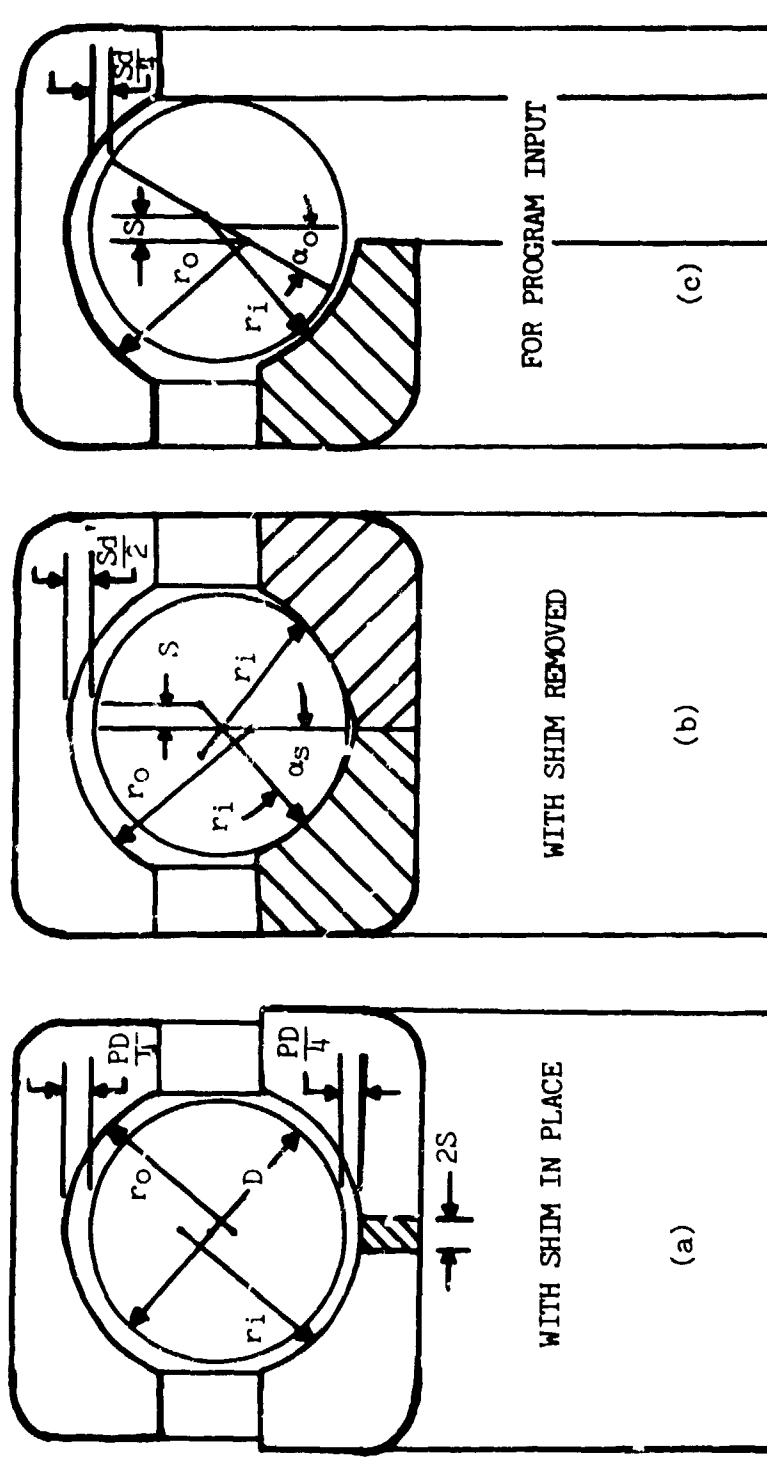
SPLIT INNER RING BALL BEARING GEOMETRY
